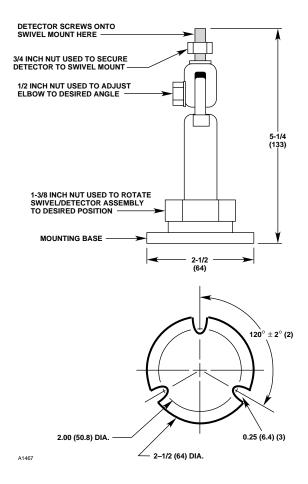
Swivel Mounting Bracket Dimensions in Inches (mm)
